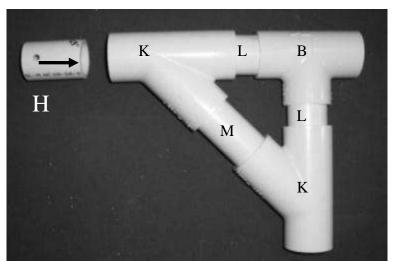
Assembly of the Medium/Large Wheelchair (Step 6).
